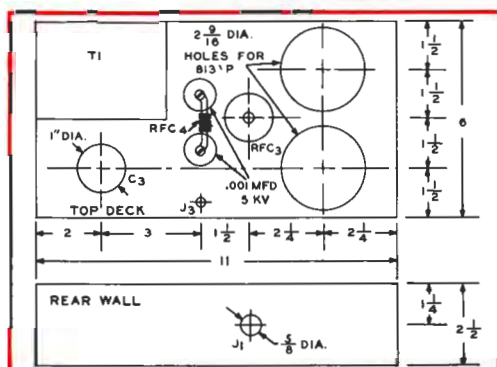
LAYOUT DIAGRAM for the amplifier sub-chassis. Holes for the machine screws which secure the components in place are located from the holes on those components.
